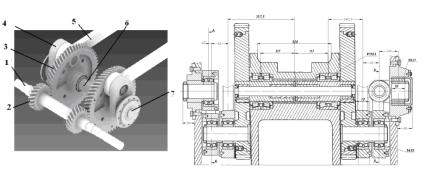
Upgrading the main drive of the mill HPT-32: 1 drive shaft; 2-gear drive; 3-wheel crank; 5 - an aluminum rod; 6 - forked shaft of the crank wheel; 7 - an additional support unit
